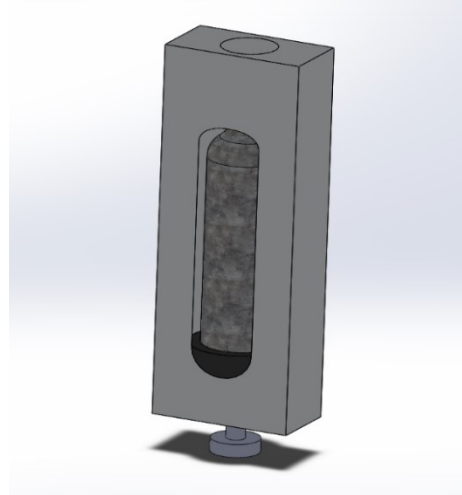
CO₂ separation early prototype. For scale, the long dimension of the rectangular housing is 113 mm.
